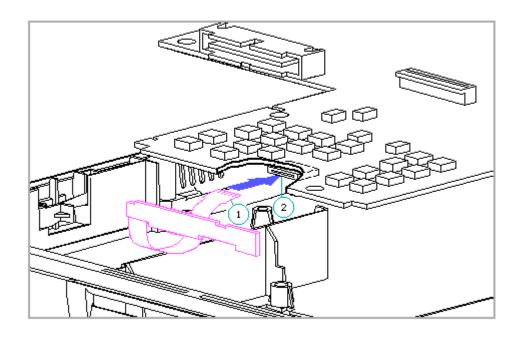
Reconnecting the LED Cable Assembly to the System Board
